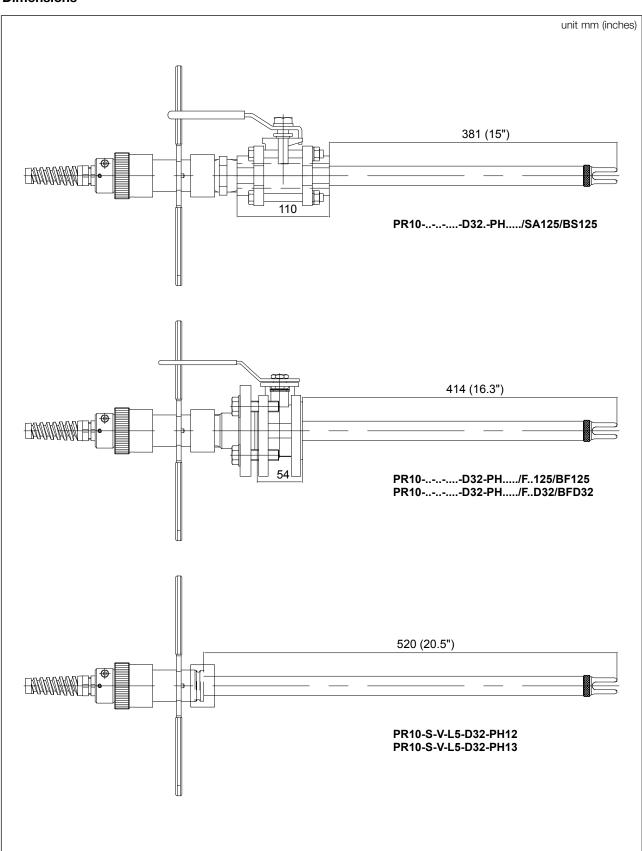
Dimensional drawing PR10...-D32 with mounted pH12 + pH13 sensor
